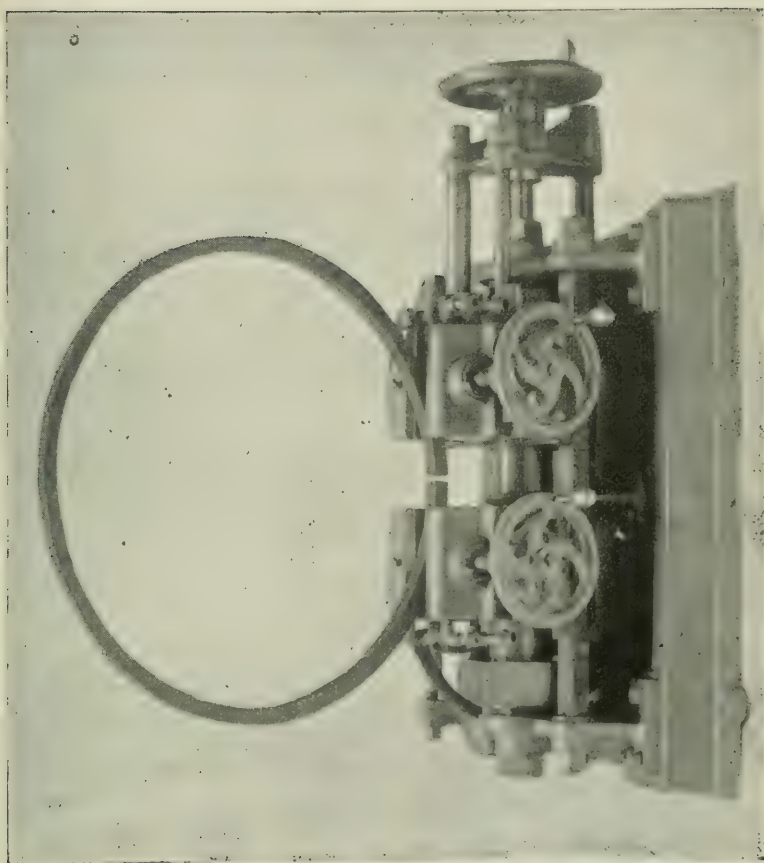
Welder with Hoop ready to weld.
